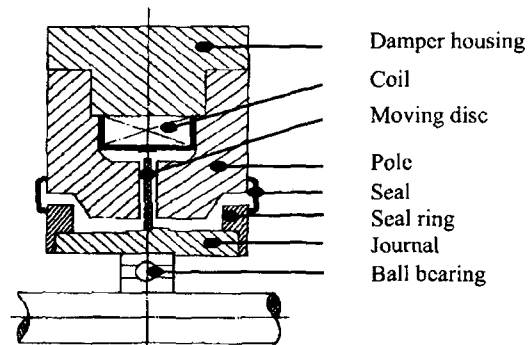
Disc-type MR fluid damper for rotor system<sup>56)</sup>
